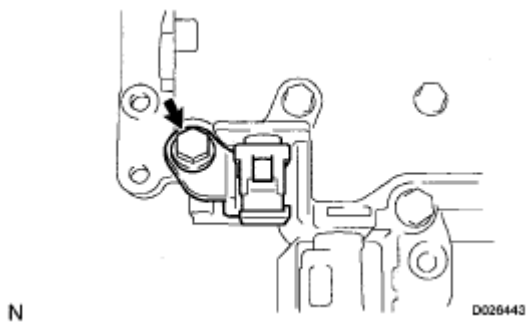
Locating Shift Solenoid Valve DSL Bolt
